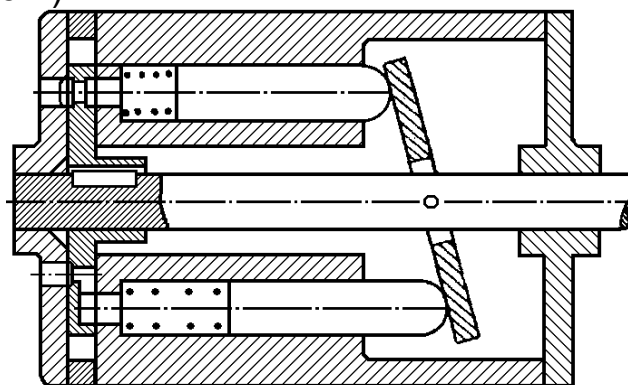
The scheme of the axial piston pump with the rotating swash plate and port plate
